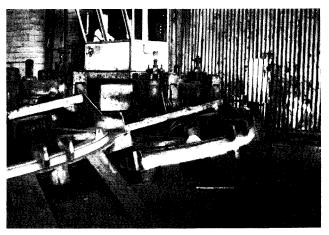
Production of reinforcement steel bars at the Tema Steelworks, 1981.
